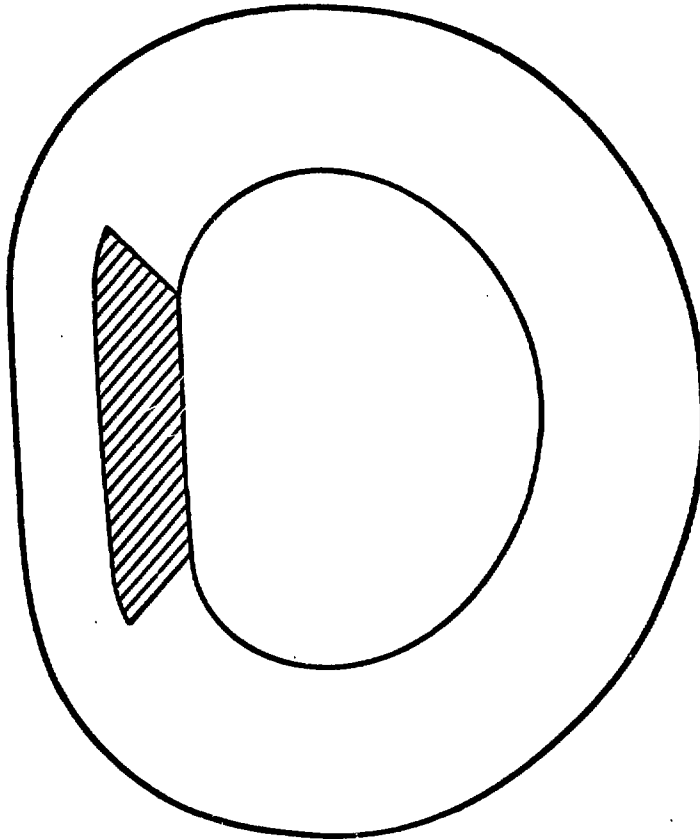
TF coil/helium vessel showing high activity portion (shaded) to be cut away by milling machine.
